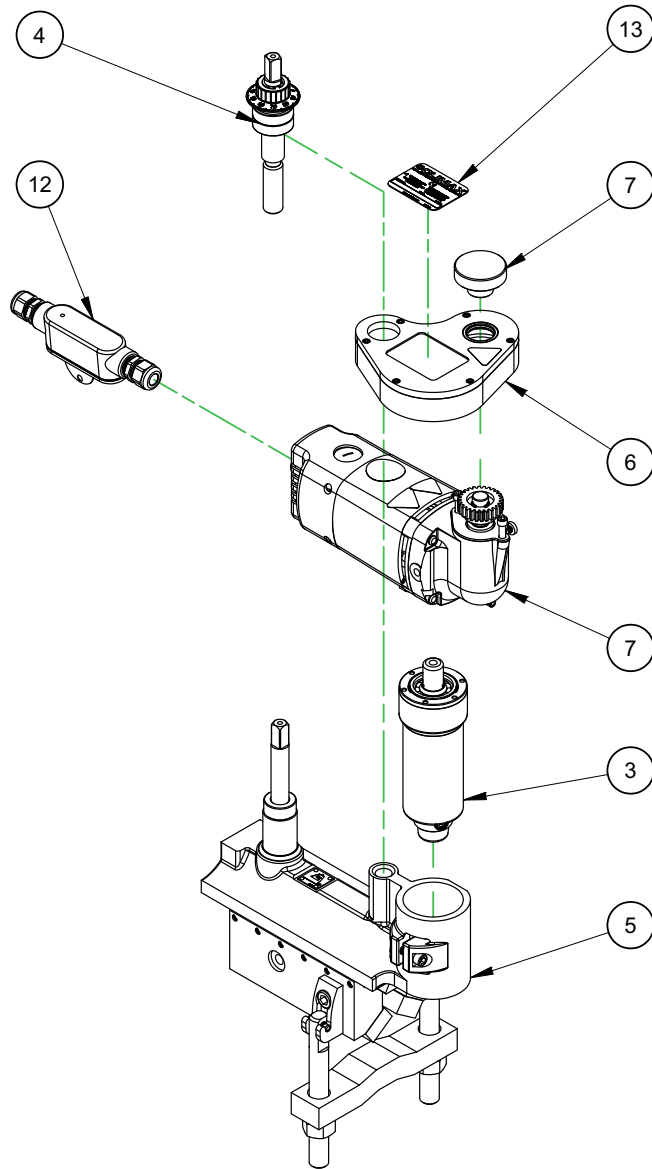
KM3000 ASSEMBLY WITH SPEED CONTROL PARTS LIST (P/N 85119)
